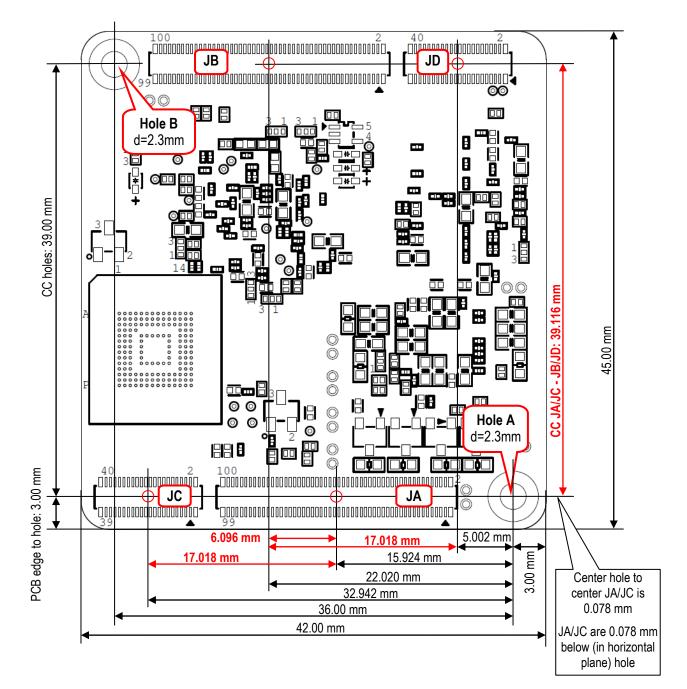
iMX7ULP uCOM Board Mechanical Outline, View from Bottom Side
